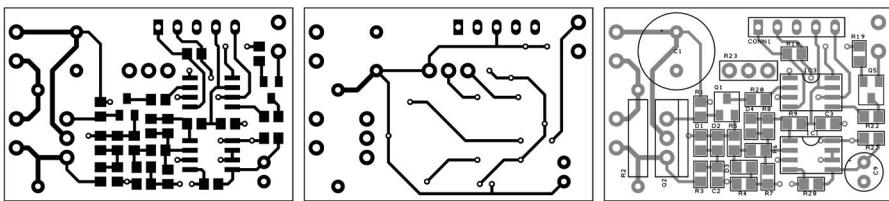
PI-4 SMT Layout (Top & Bottom) & Parts Placement
